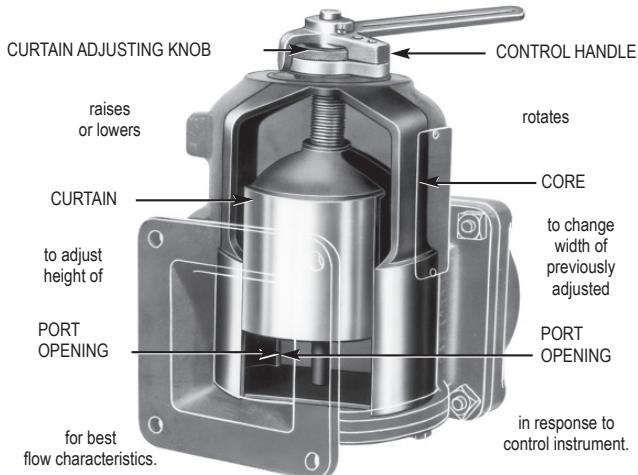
Figure C. Adjustable Port Valve for cold or hot air, 3 psi or less.
